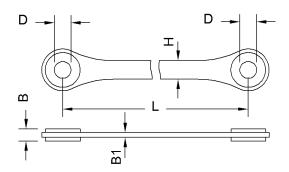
Dimensions of backstay strap suspension spacer on 1507 fixed jib
